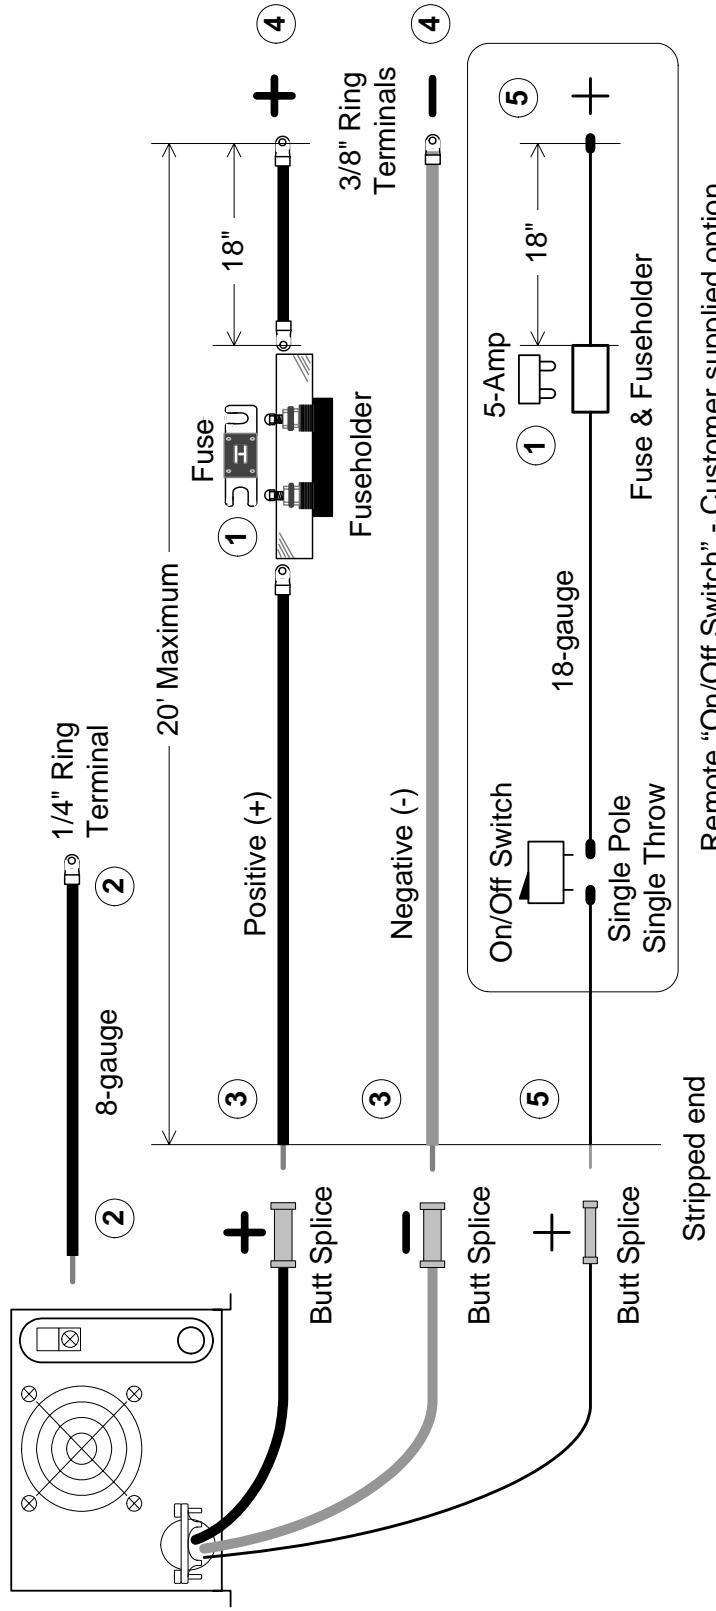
Inverter Cable Assembly and Remote On/Off Switch Assembly Kit
